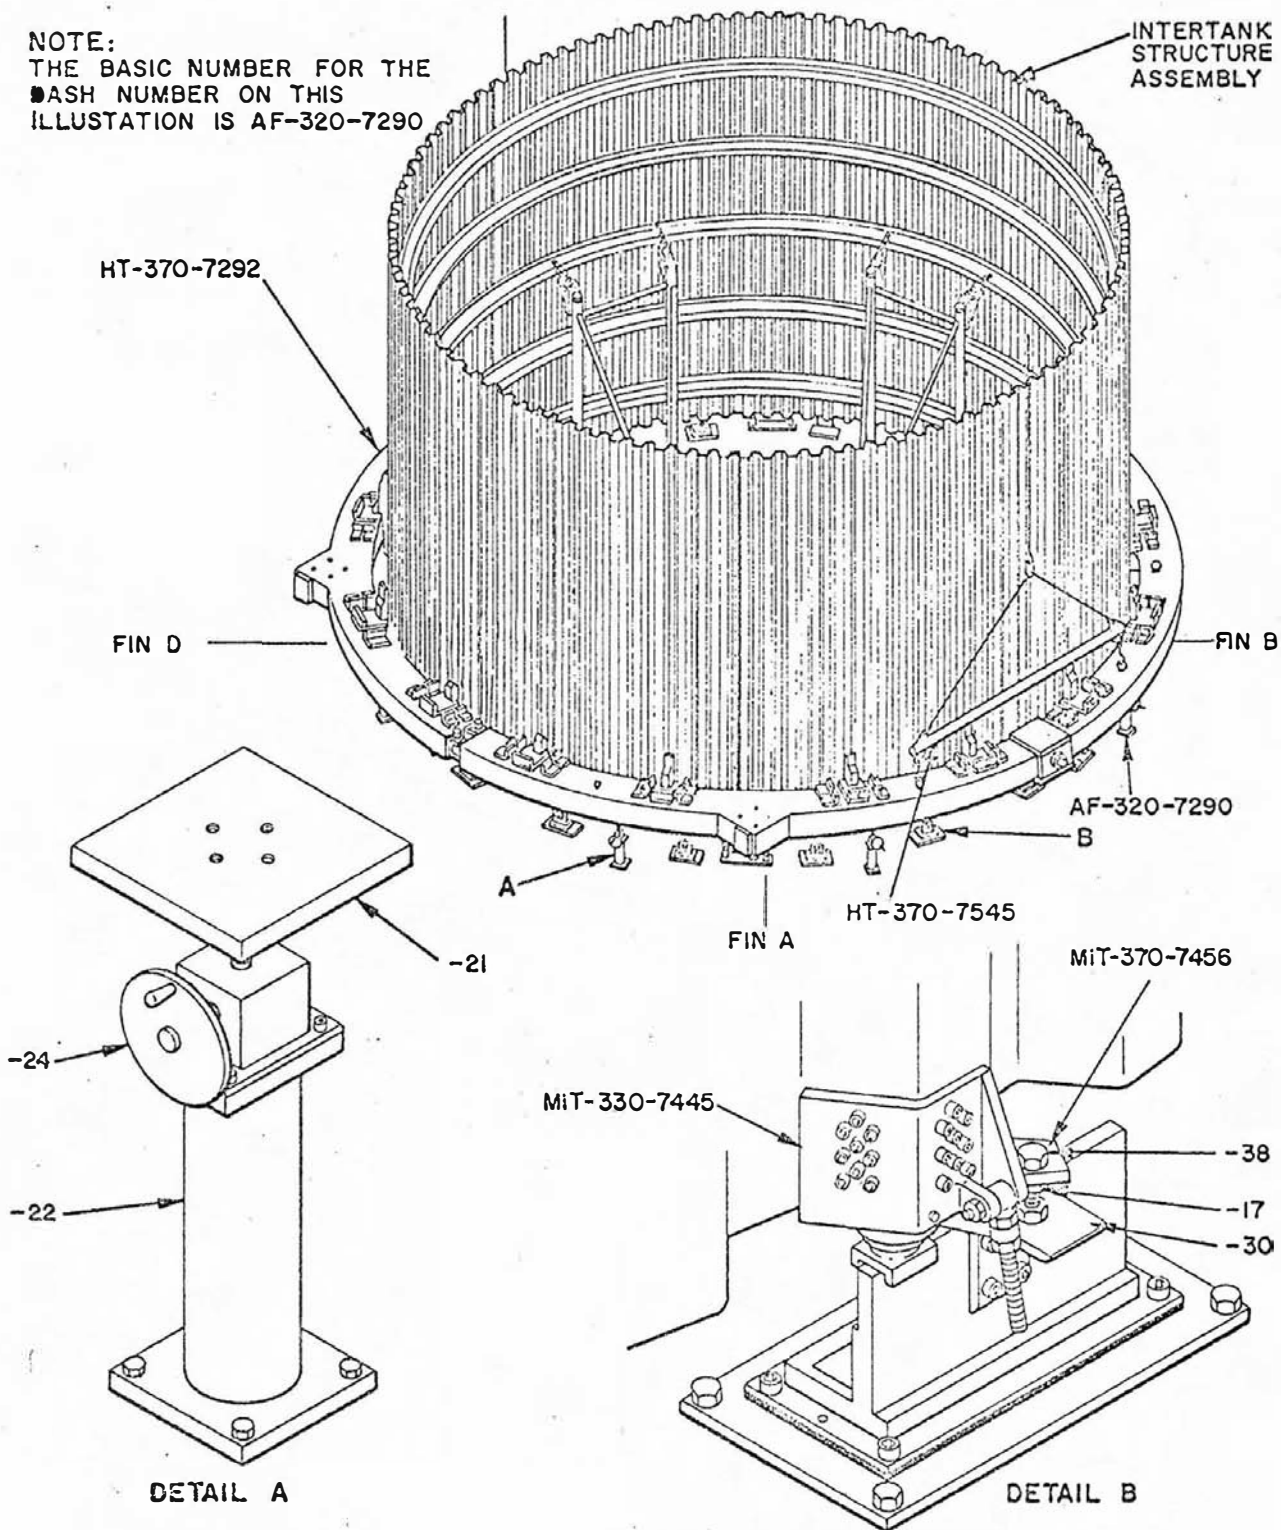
Removing Intertank Structure Assembly from Assembly Fixture AF-320-7290
